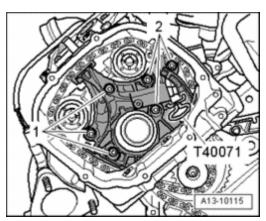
Identifying Center Bolt, Crankshaft Toothed Belt Gear & Diamond Disc Courtesy of VOLKSWAGEN UNITED STATES, INC.
